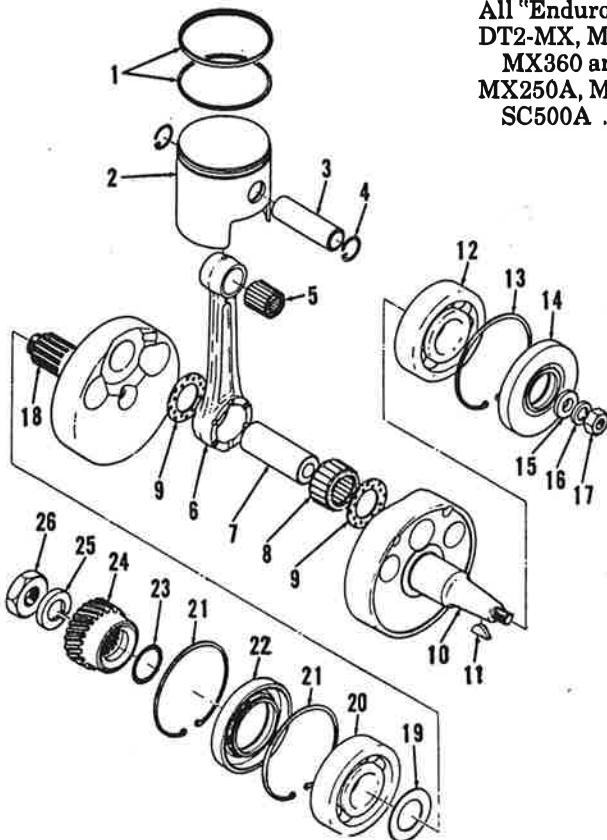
Exploded view of typical crankshaft assembly.
